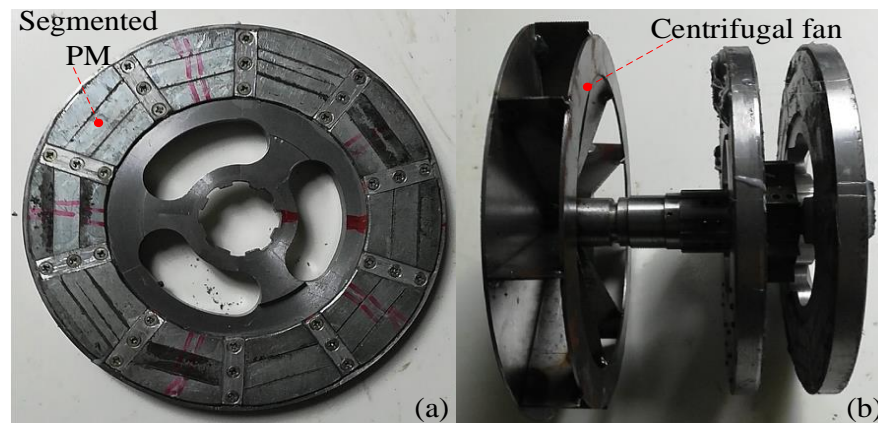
Rotor component (a) single rotor, (b) two rotors with centrifugal fan.
